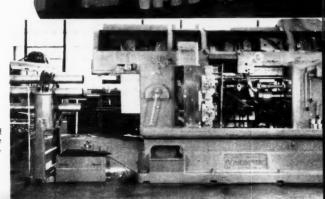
Front view of five-inch, four-spindle Conomatic Model KL.
